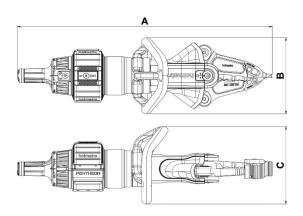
Holmatro's combi tool with cutting blades and spreader tips
